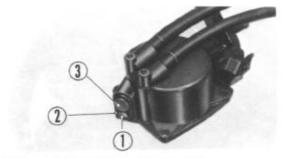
① 4 mm screw ③ Valve seat ② Clip plate
